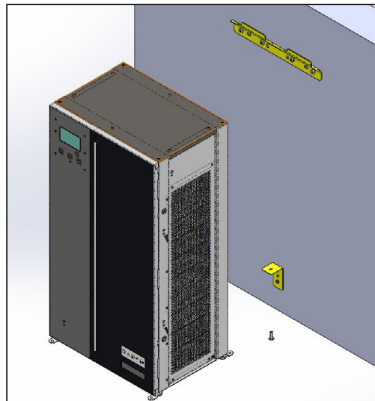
Charger, Wall Mount Hanger, Bottom Bracket and Screw
